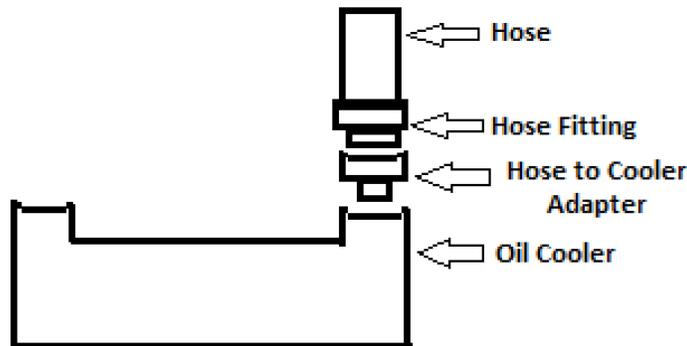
Drawing shows How the Oil Cooler is Connected to the Hose
